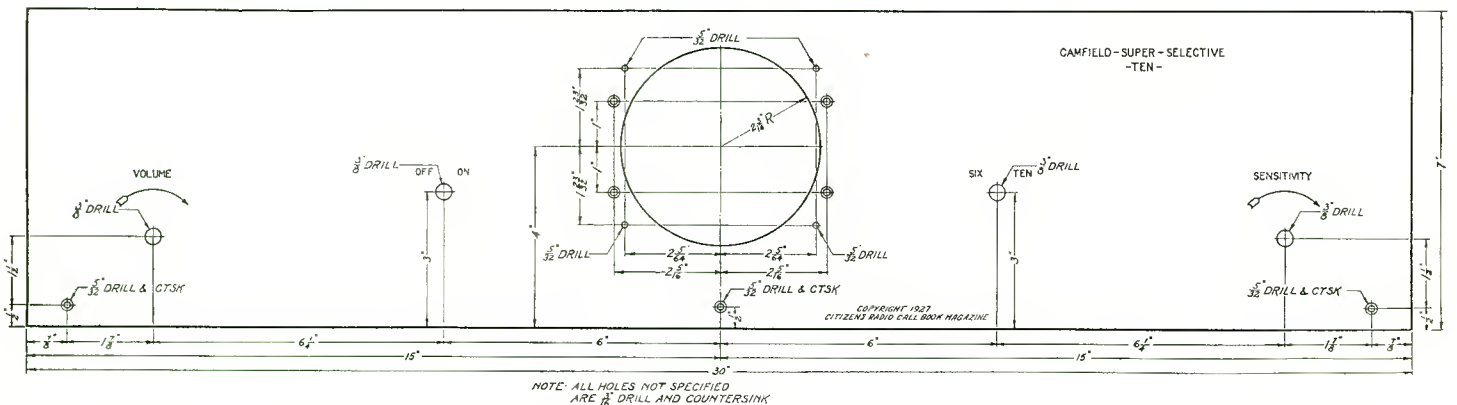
Dimensions of the front panel and location of required holes are shown in the above sketch. Full sized blue prints of this receiver may be secured if desired. See page 193 for list of prints available
